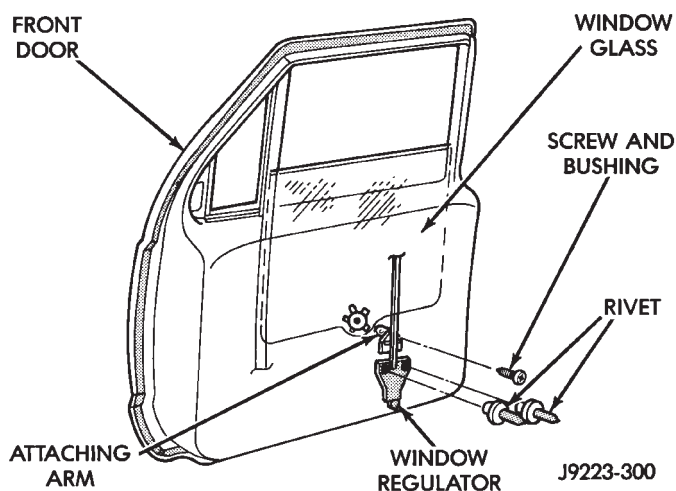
Manual Regulator Installation—Lower Rivets and Glass Retaining Screw
